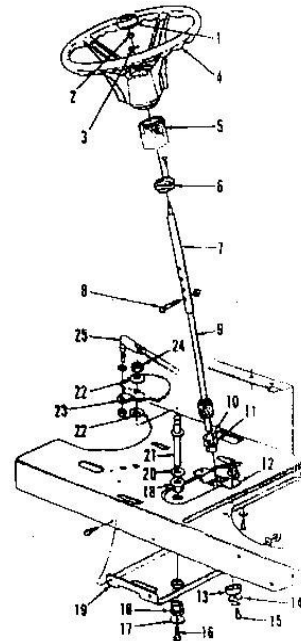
A—Exploded view of steering mechanism used on 800 Series Models 840 through 849
